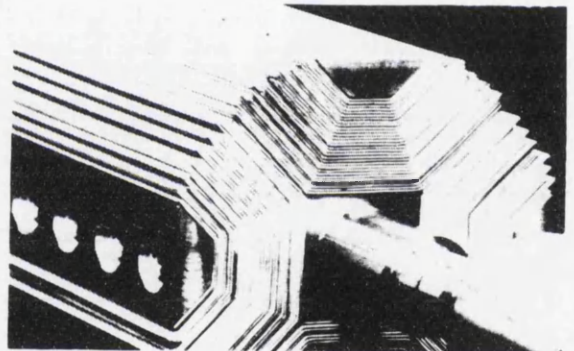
Assembled 7.5kW axially-laminated rotor before turning and grinding operations.
